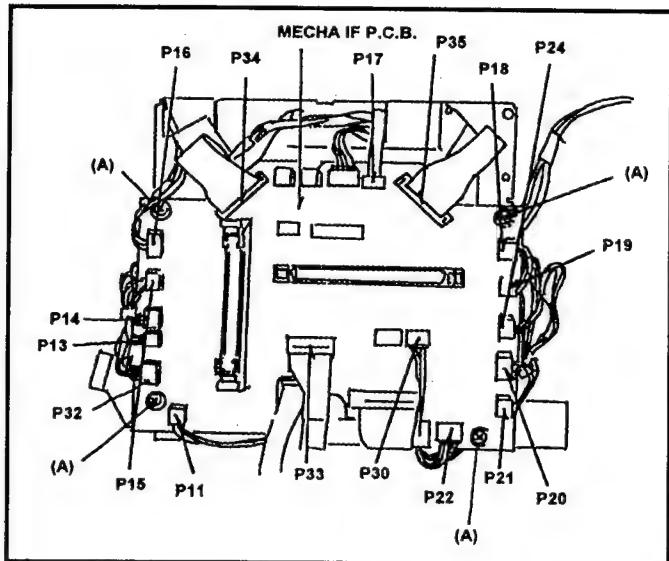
Connection of Mech I/F P.C. Board
